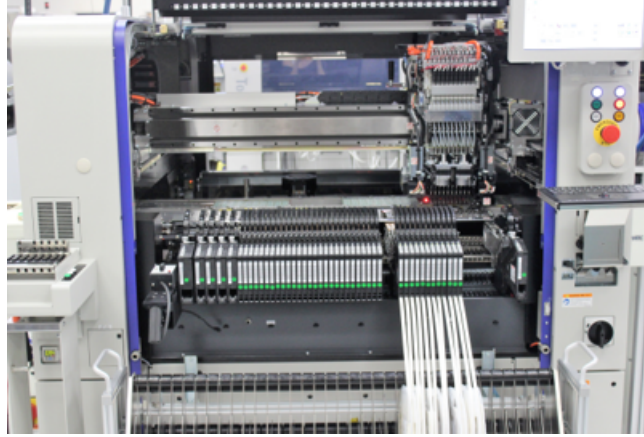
A pick and place machine and its reel-typed feeder mechanism. [5]
